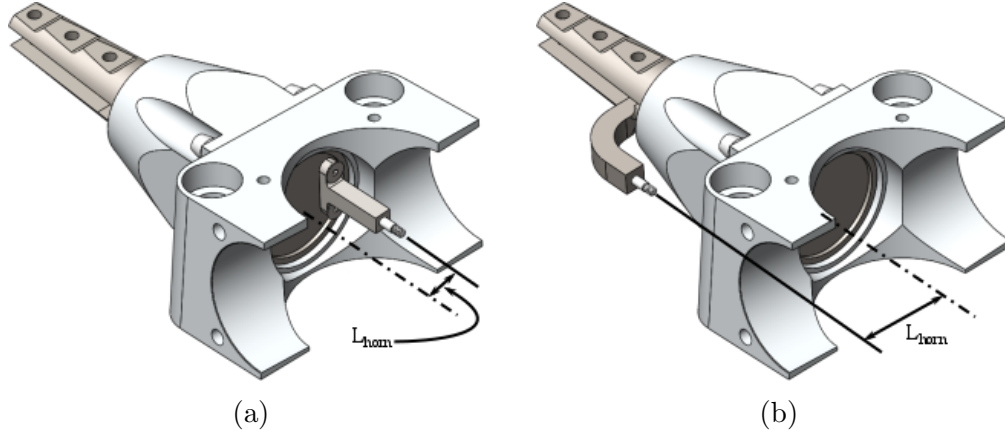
Pitch horn geometry, (a) Upper rotor, (b) Lower rotor
